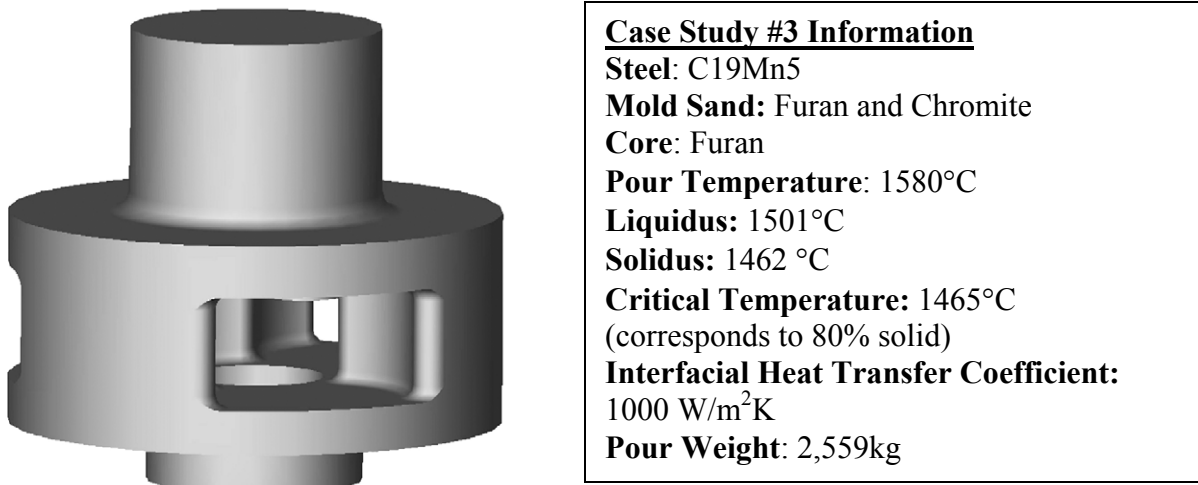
Left: CAD drawing of the planetary gear casing for case study #3. Right: simulation parameters.
